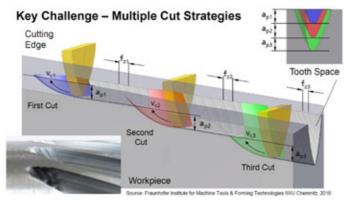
Production of the tooth space on the workpiece using the multi-cut strategy [3] and illustration of the kinematics with sickle-shaped chip formation when rotating the workpiece and tool with crossed axis arrangement (axis cross angle)
